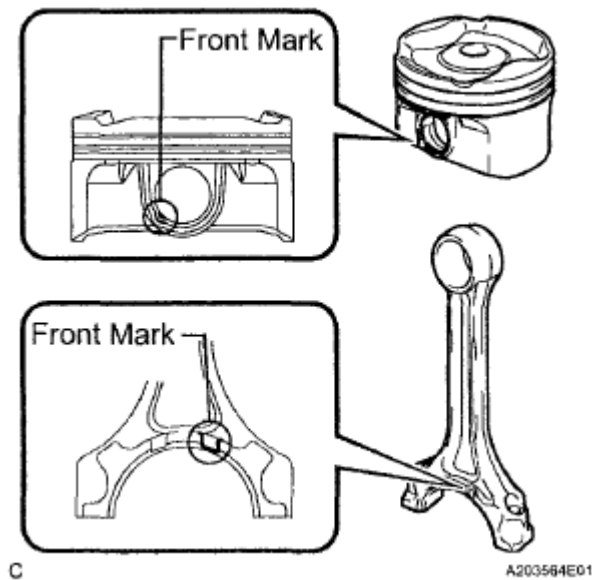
Identifying Front Marks Of Piston And Connecting Rod
